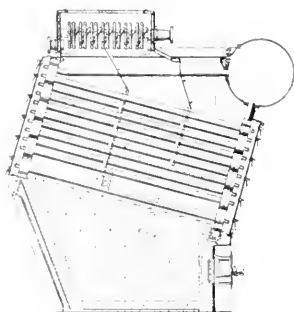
Babcock & Wilcox three - pass sectional - header boiler
